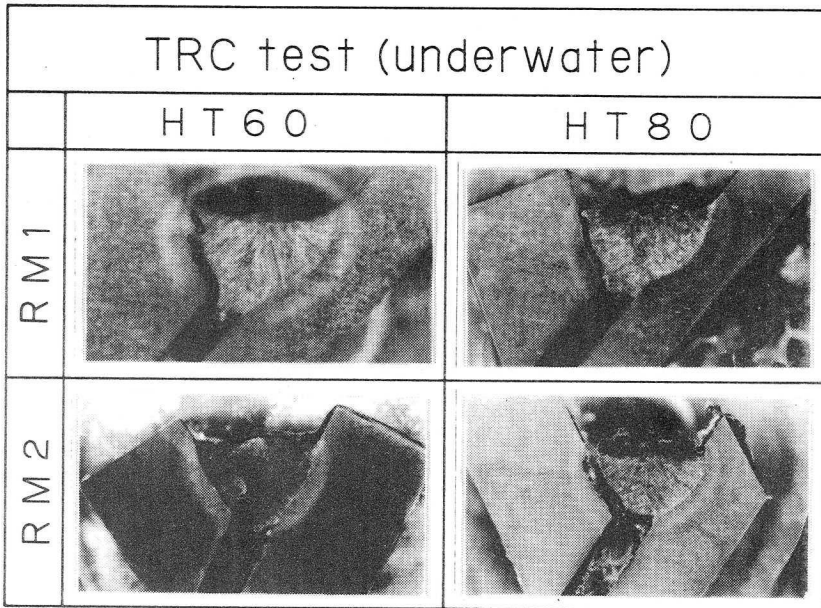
Typical root crack in the weld of TRC specimen
